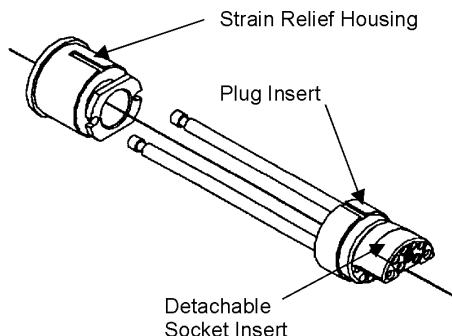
A1-37. Installing the spacing shafts of the plug insert.
